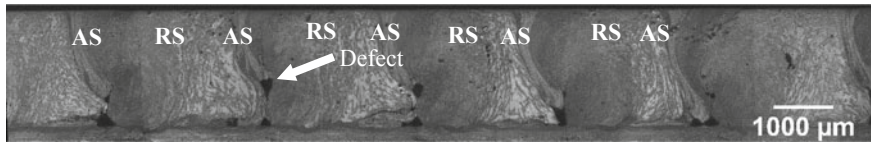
Blank processed at 60% tool shoulder overlap and bidirectional raster tool path
